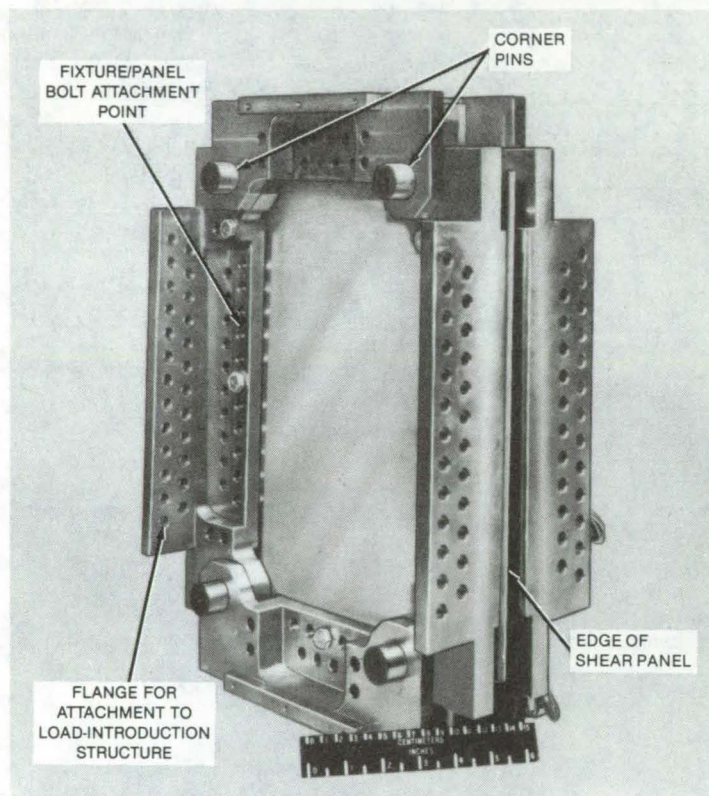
The new Shear-Panel Test Fixture includes eight frames and eight corner pins. The fixture is assembled in two halves with the shear panel sandwiched in between.
